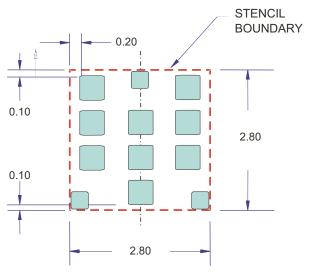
Solder Stencil Overlaid on ACMD-7403 Bottom Metal Pattern
